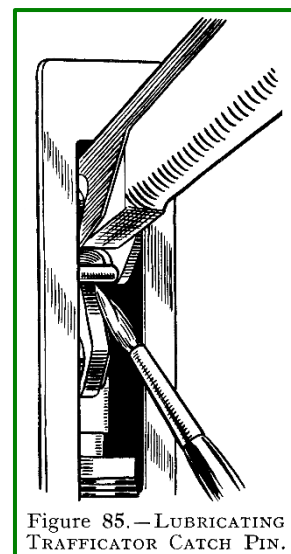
LUBRICATING TRAFFICATOR CATCH PIN.
